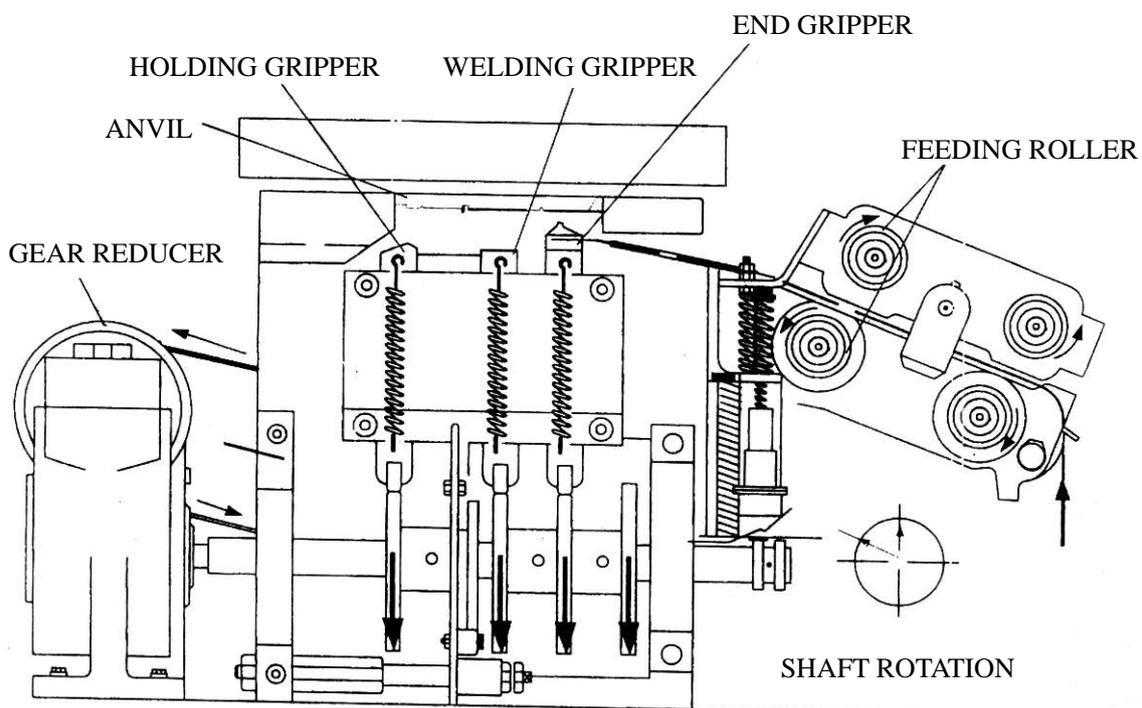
WELDING STRAP IS RELEASED;
